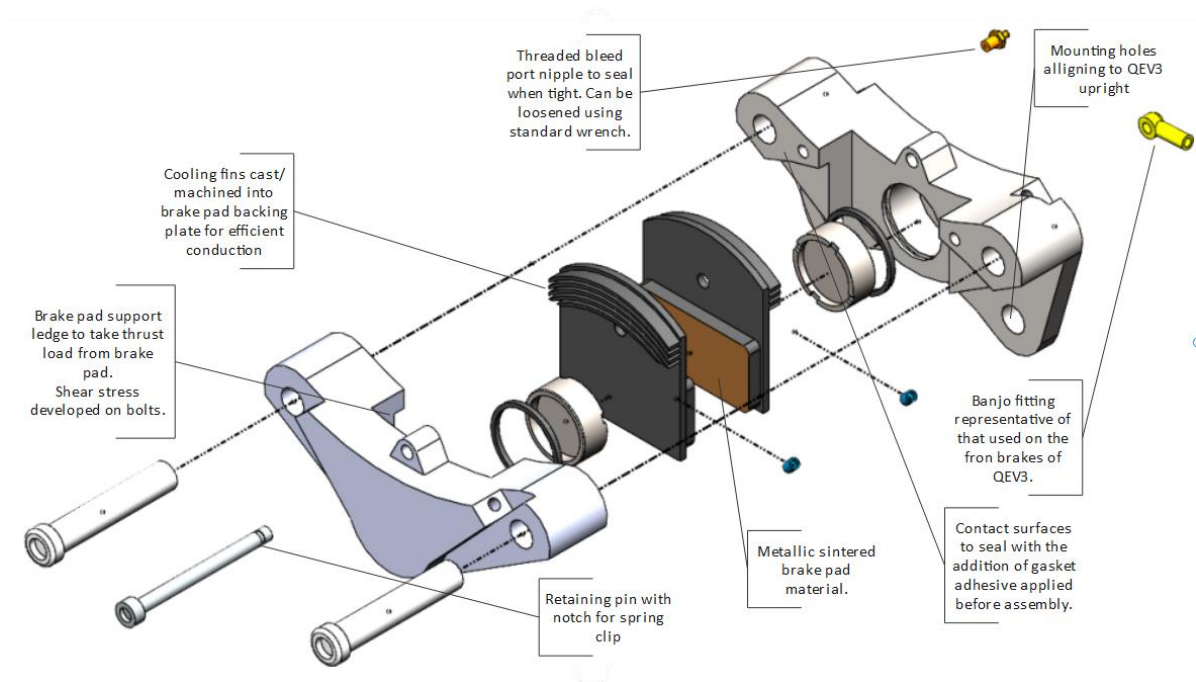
Annotated exploded Architectural view of calliper assembly concept.
